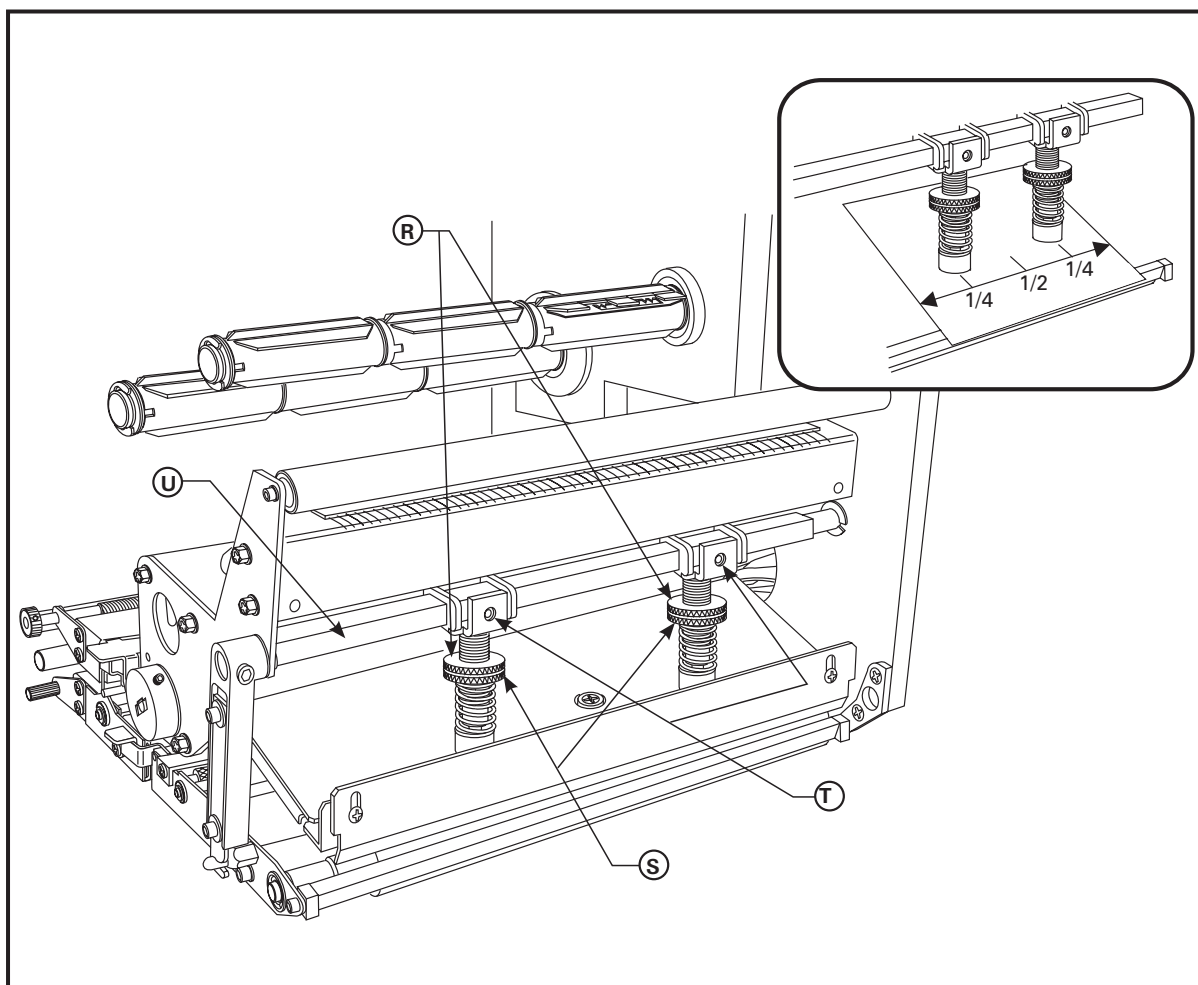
Printhead Pressure (Right-Hand Unit Shown)
